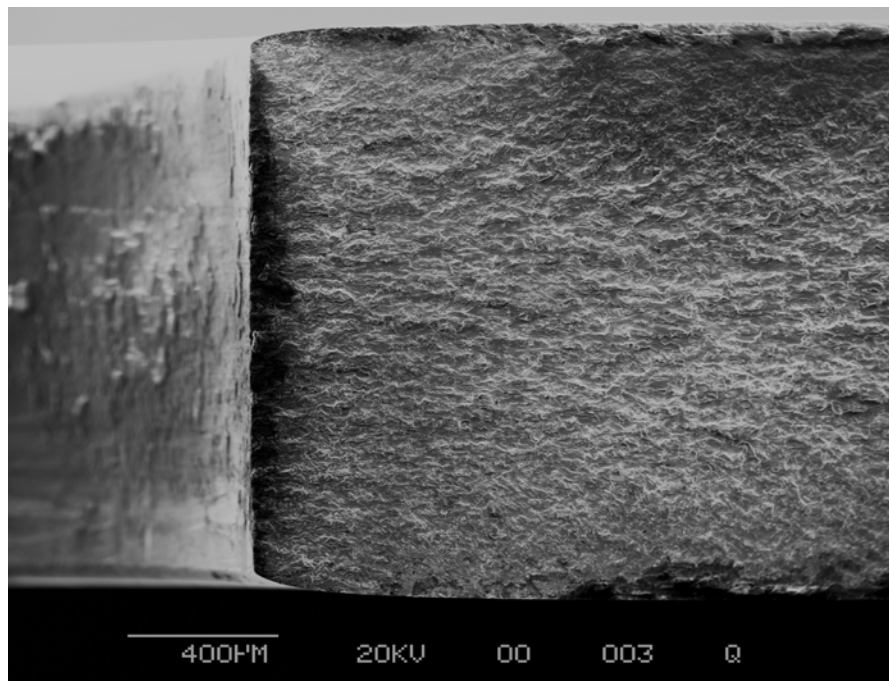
Fracture Surface of specimen 3S showing crack initiation area
